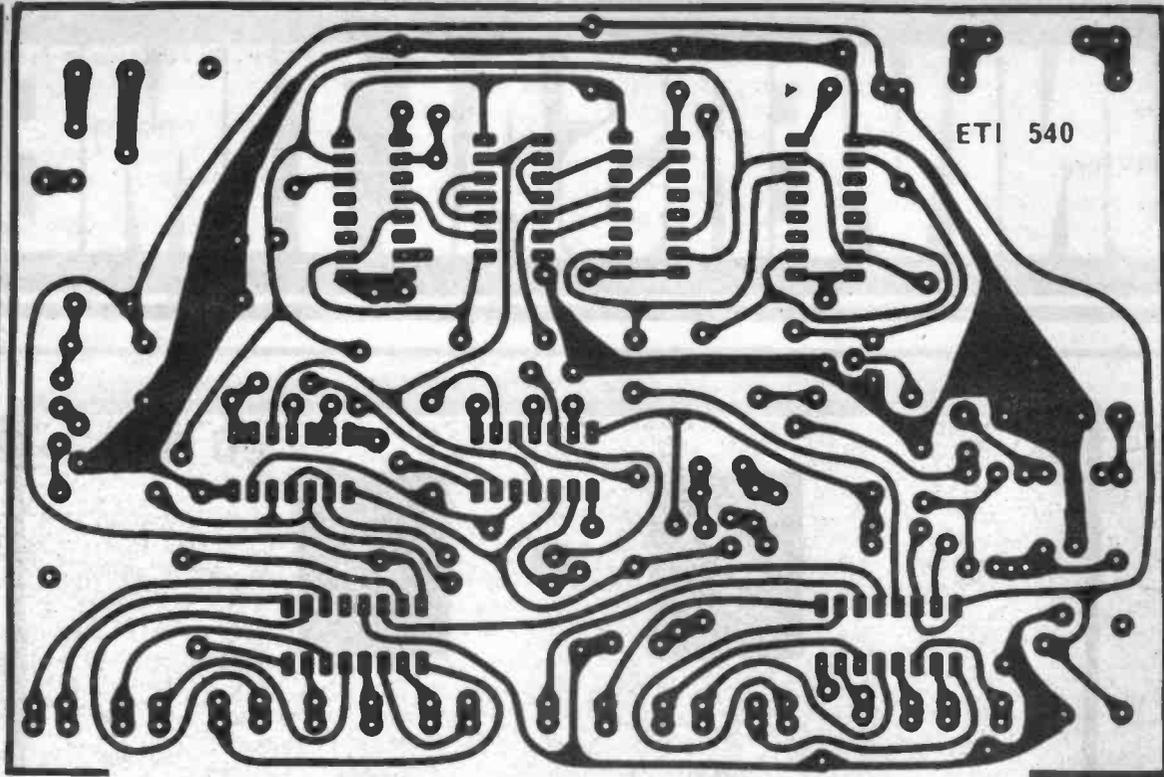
Printed-Circuit board layout for the timer. Full size 153 x 100 mm.
